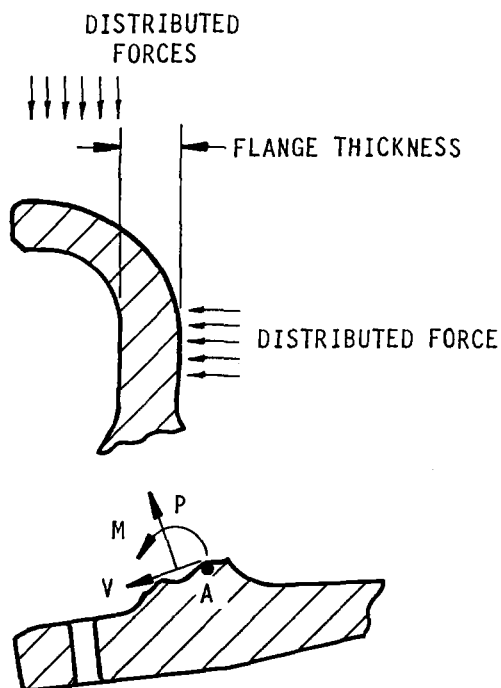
An illustration of the distribution of loads on the aircraft wheel flange.
